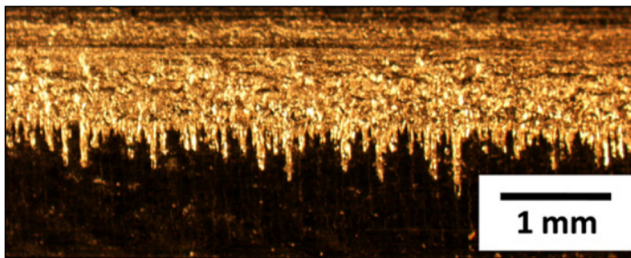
Longitudinal weld section from keyhole mode LBW showing root spiking [137]
